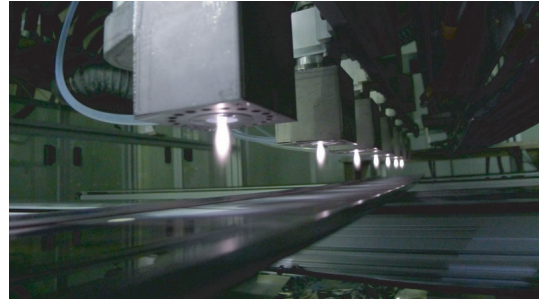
Multiple plasma jets in the demonstrator machine of Fig. 1 activated for coating operation, very similar to the inkjet nozzles in an inkjet printer ready to print.
